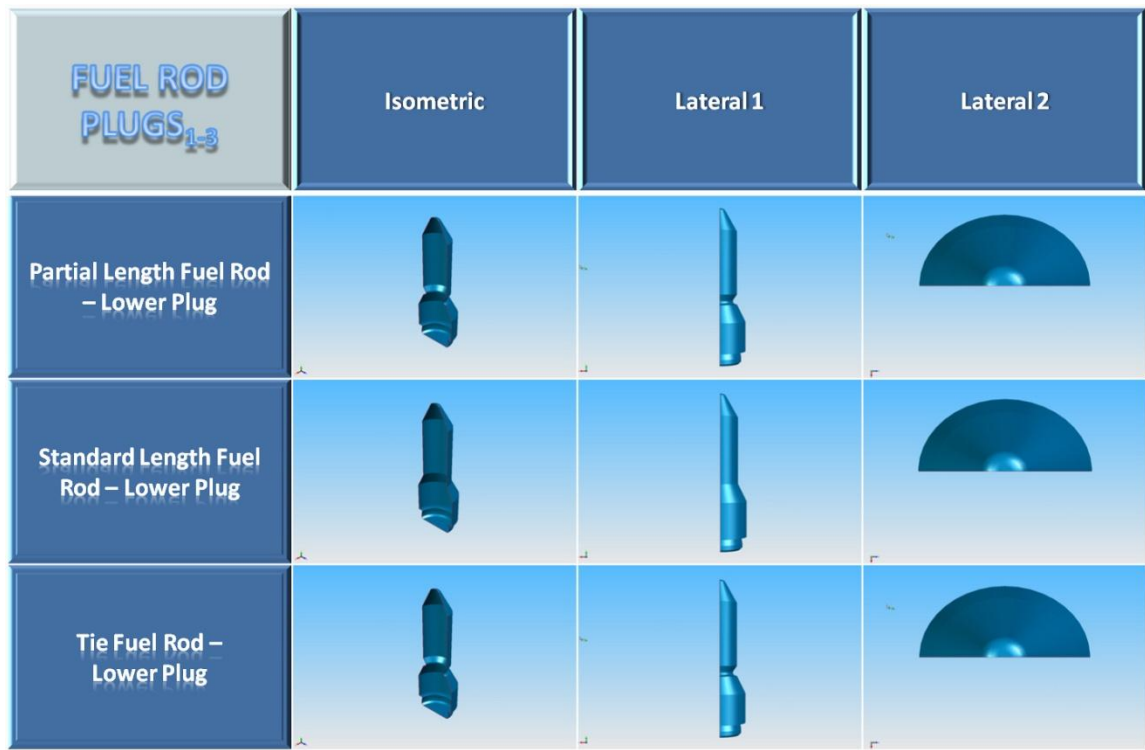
CAD solid models of lower plugs for all fuel rod types.
